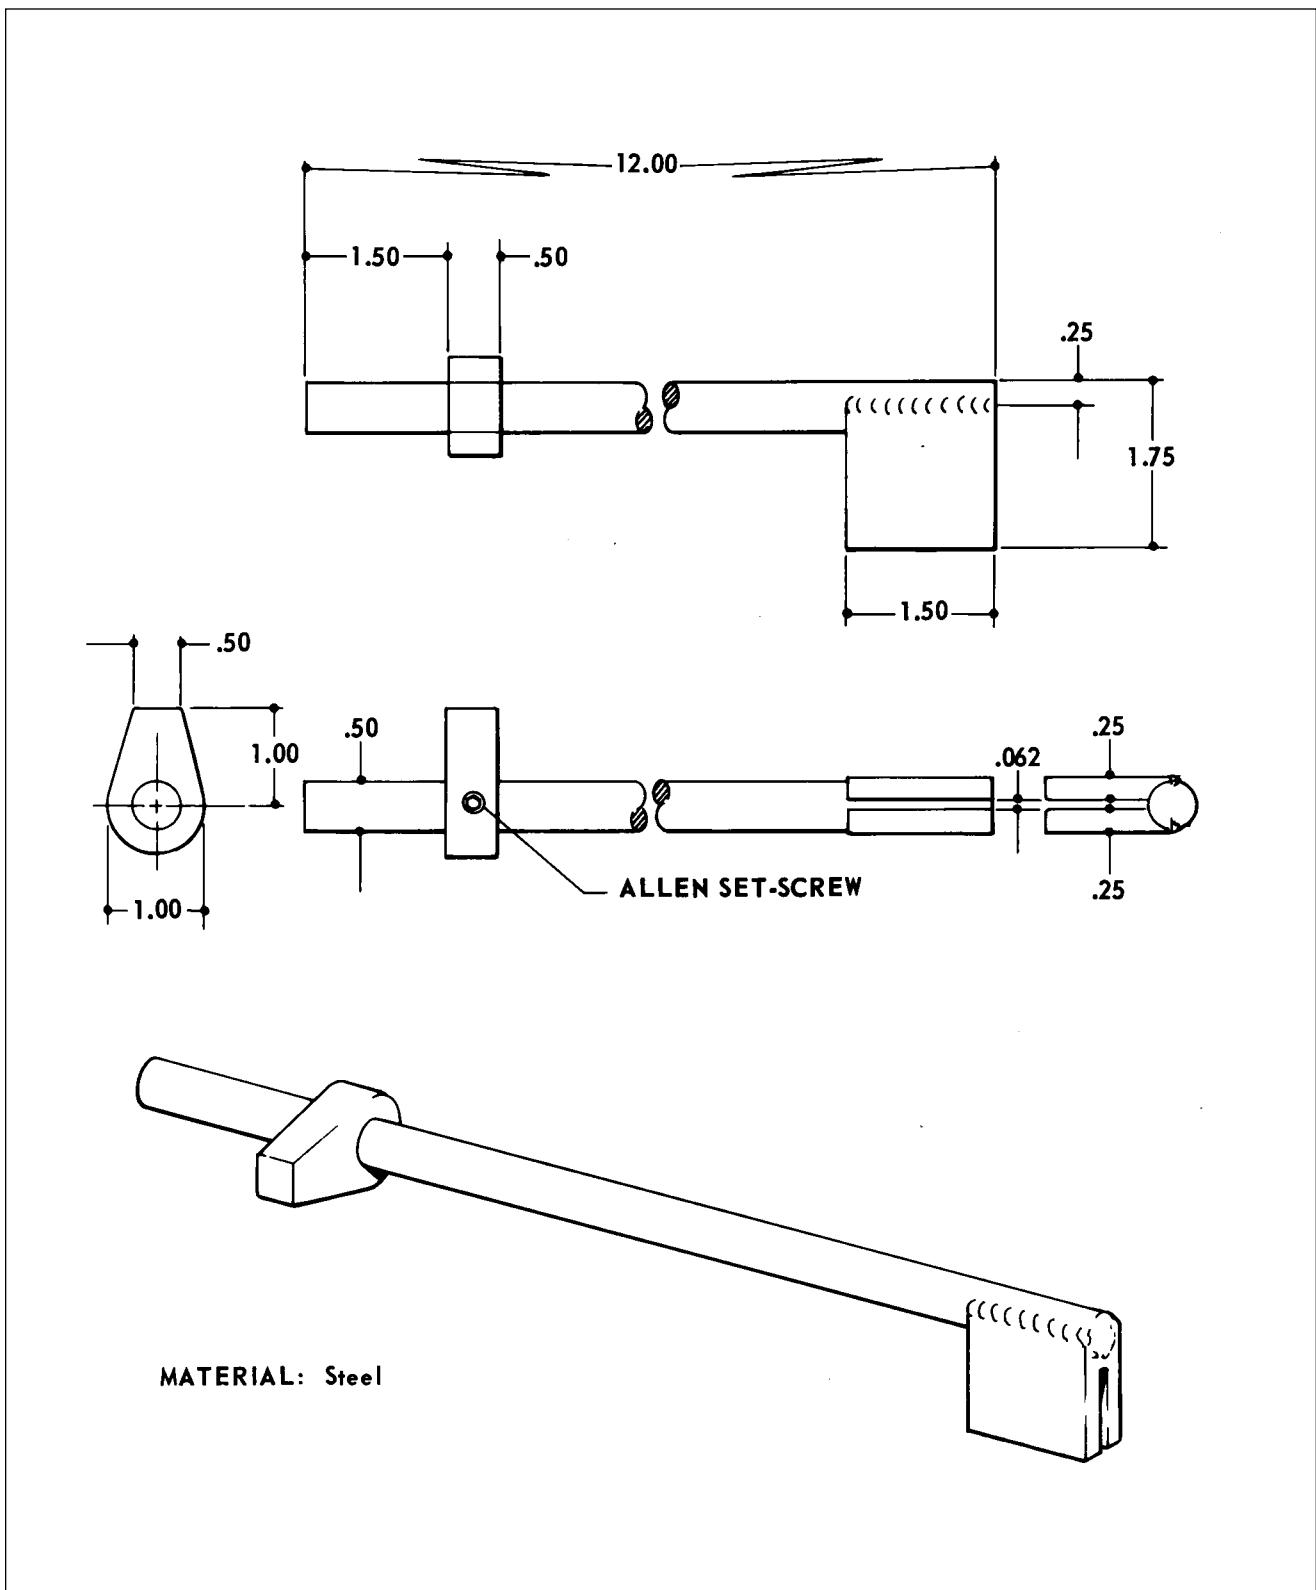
Fabricated Gear Back-Up Extender Actuator Aligning Tool
